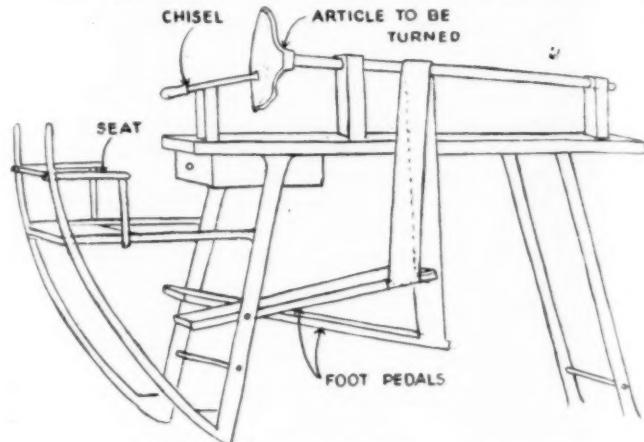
A FOOT-POWER CHINESE METAL LATHE
